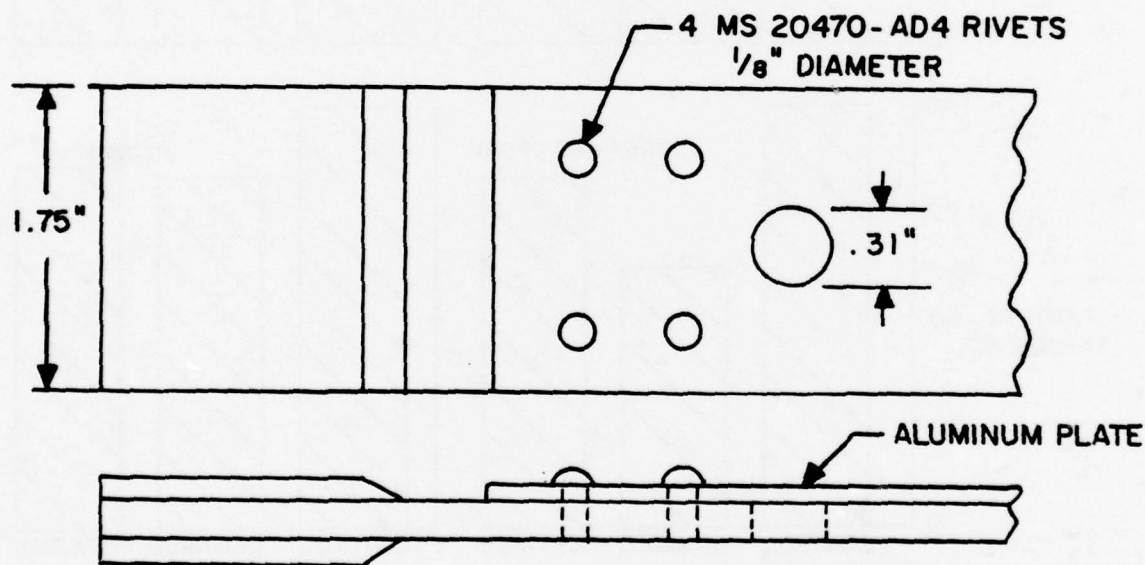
Repair of Aluminum Tensile Test Specimen Damaged via a Drilled Hole
